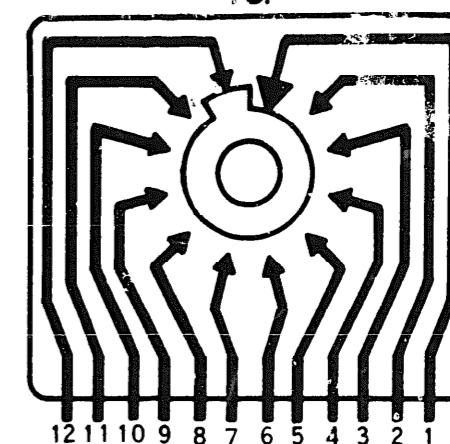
(3). Printed circuit board and component assembly, wiring diagram (sheet 3 of 4).
